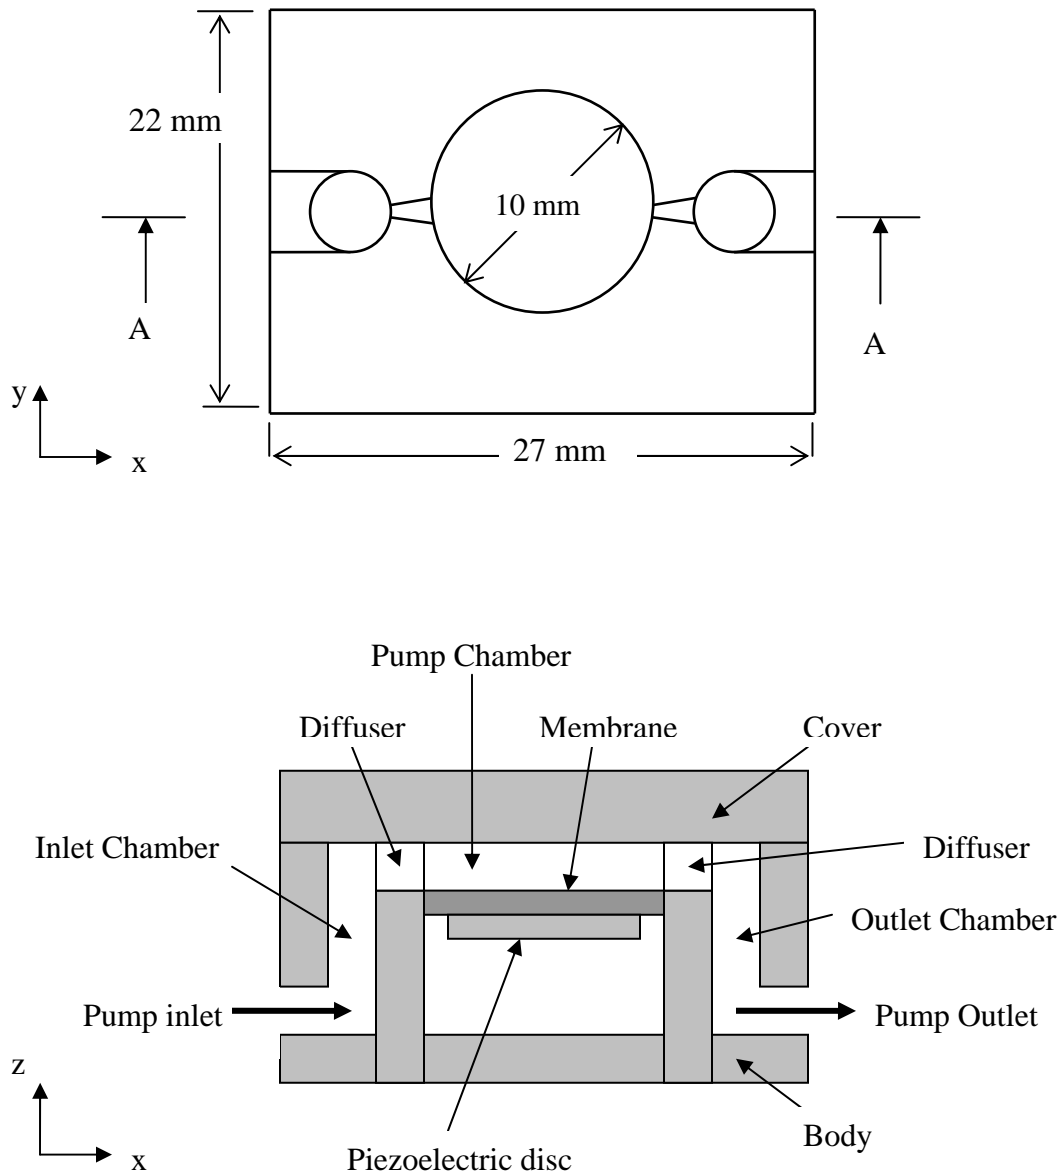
Schematic of the piezoelectric pump (inlet and outlet pipes are not shown).
